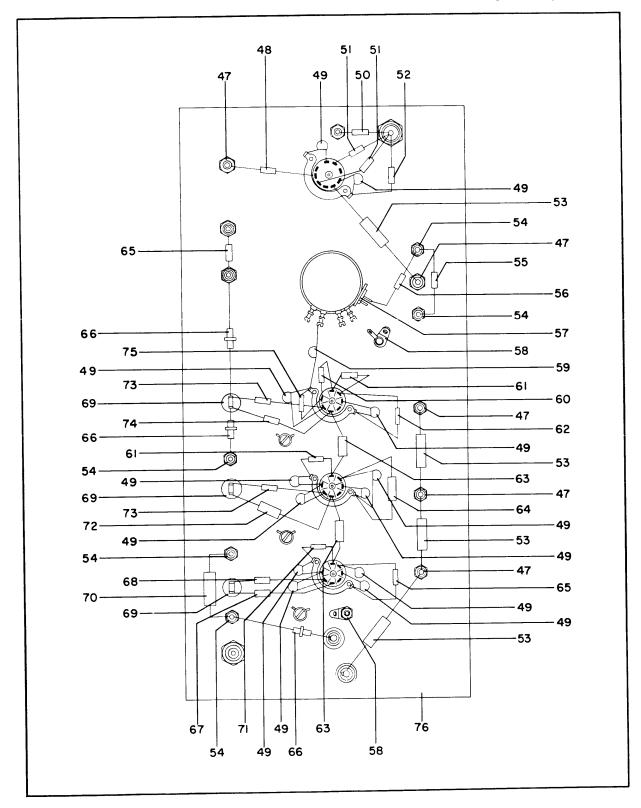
Sweeper Assembly, Bottom View (Sheet 2 of 2 Sheets), Index Nos. 47 through 76
